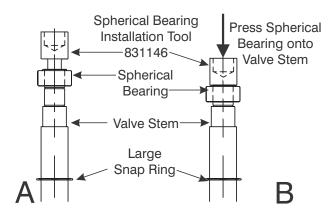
Start Spherical Bearing onto The Valve Stem.
